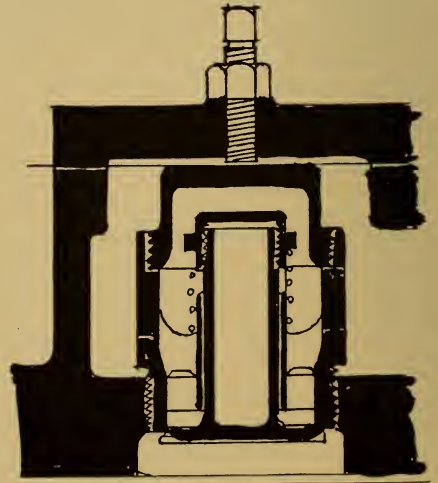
SPRING-LOADED POPPET VALVE. WORTHINGTON PUMP COMPANY, LTD.
